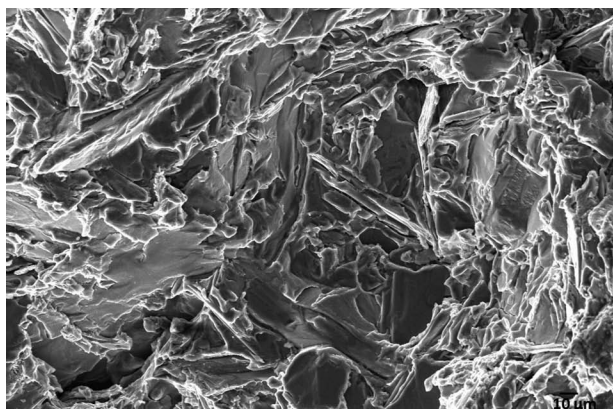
Another view of the fracture surface shown in Fig. 244. Presence of fine dimples at isolated locations can be seen
